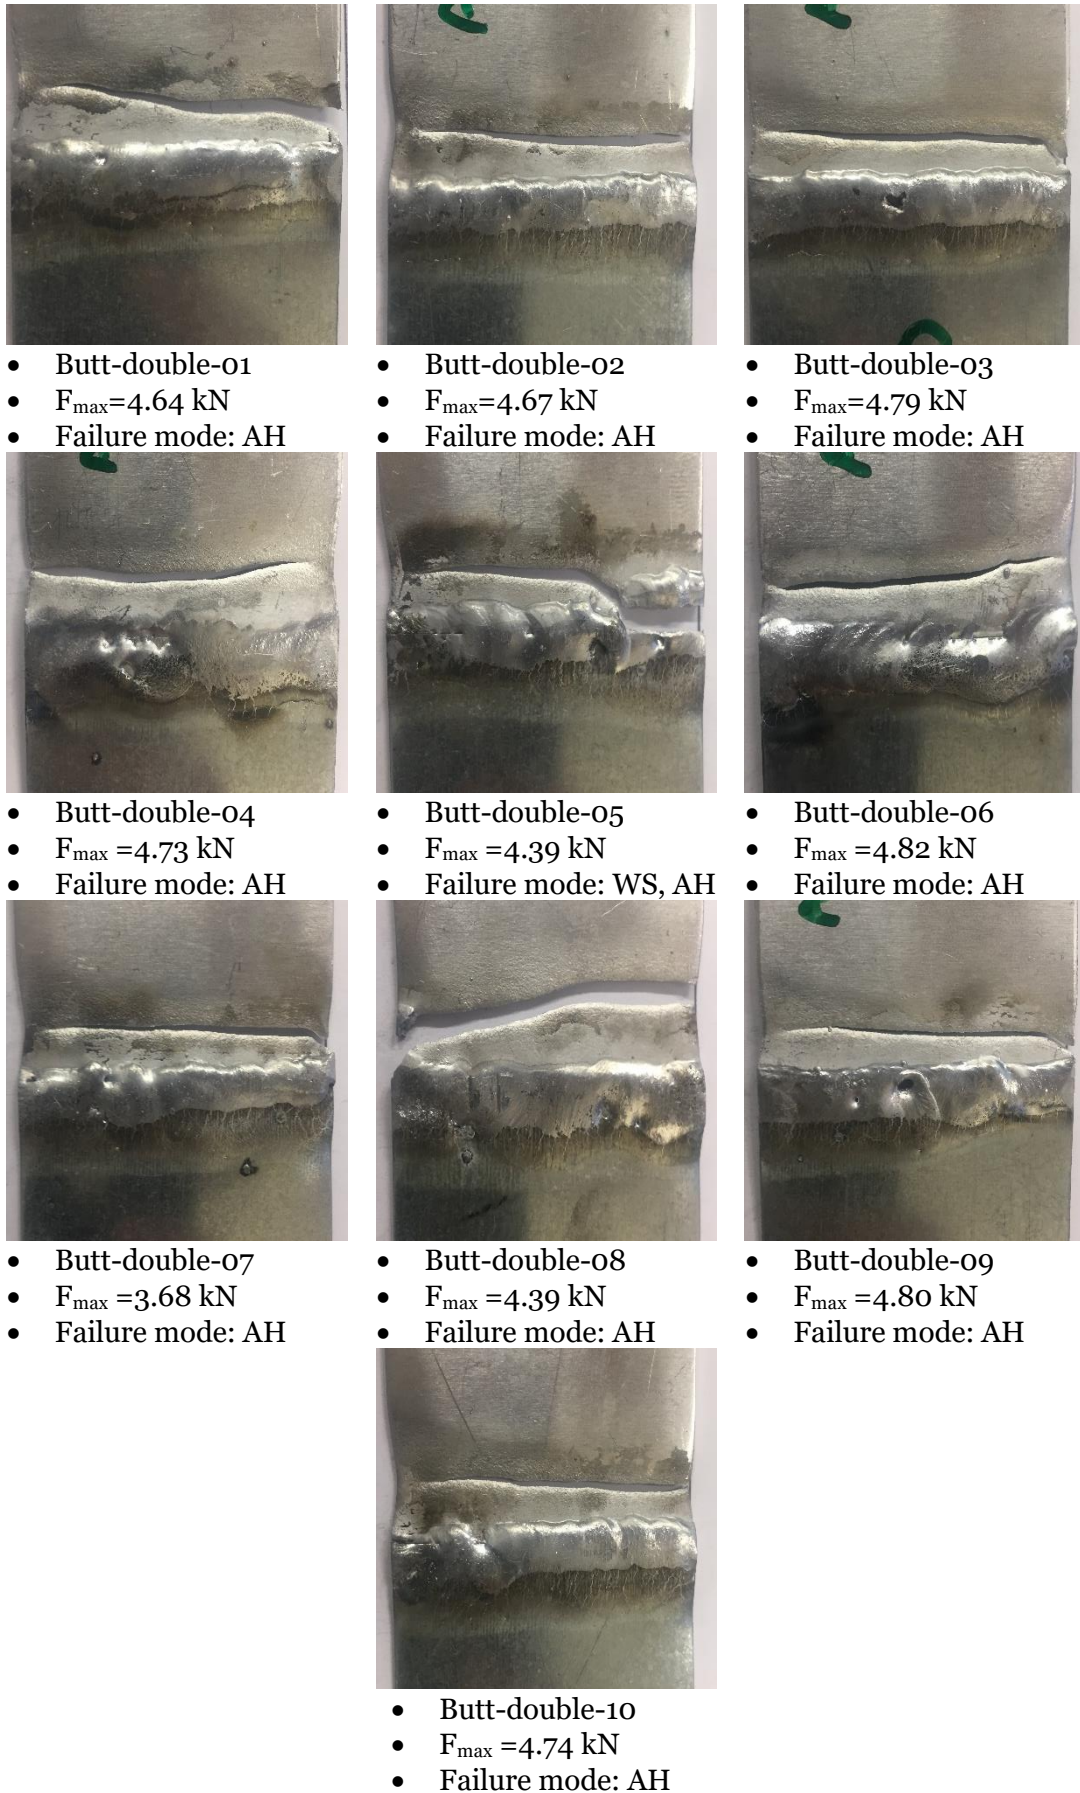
Tensile static failure of double-butt-welded joints (short-term).
